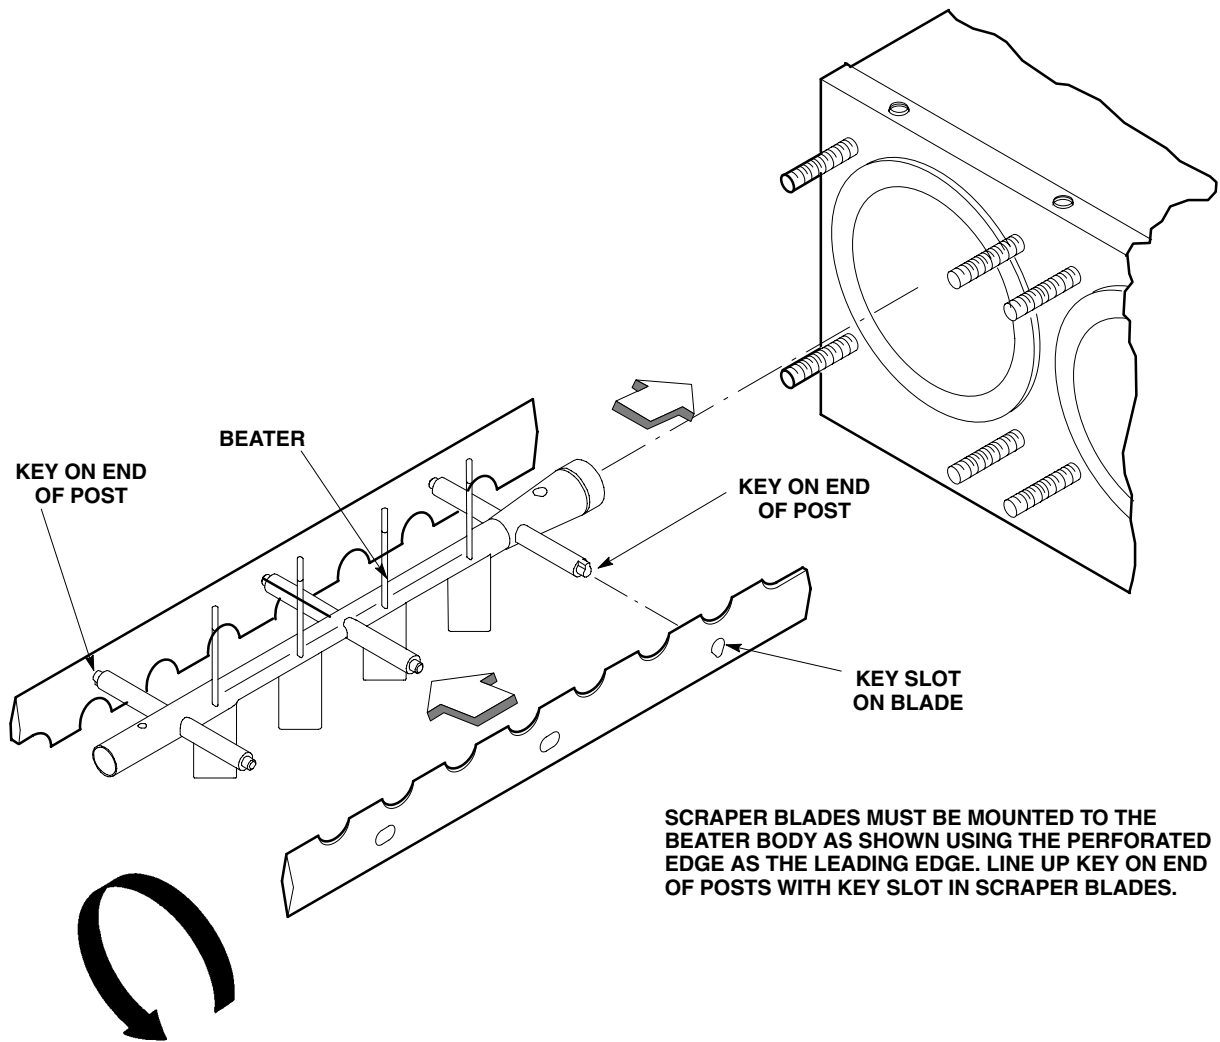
BEATERS AND SCRAPER BLADES INSTALLATION
